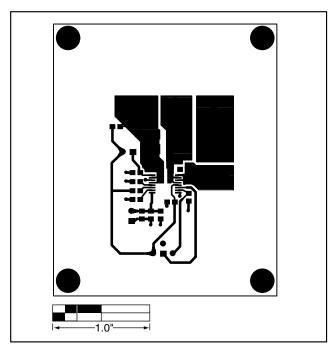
MAX1644 EV Kit PC Board Layout—Component Side
